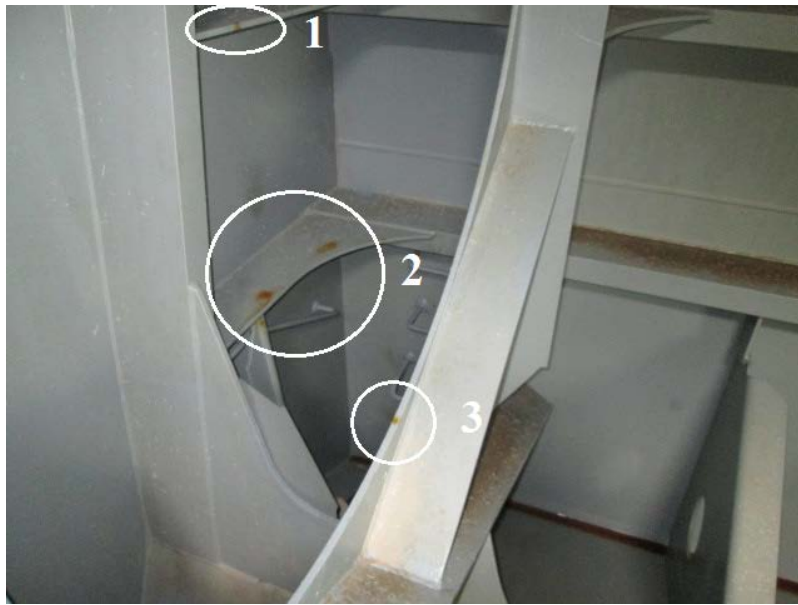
Deckhead after welding (Clipper Posh 2014)
